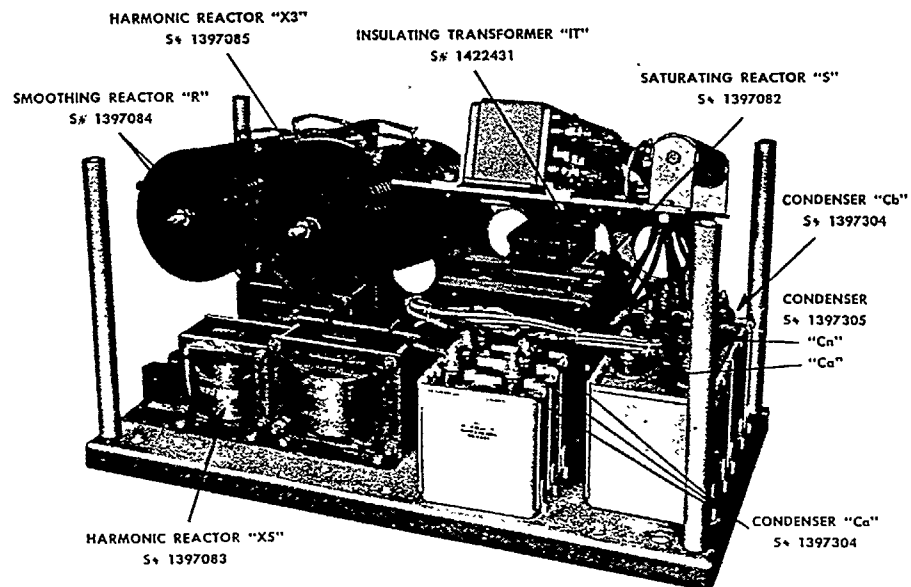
Automatic Control Unit — Cover and Right Side Brackets Removed
